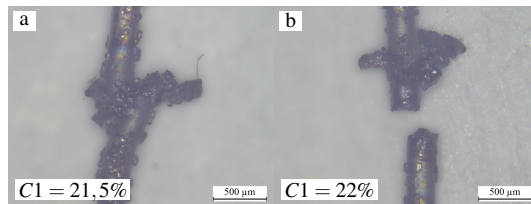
Welds performed with parameters a) PT10, b) PT11 (Table 11).
